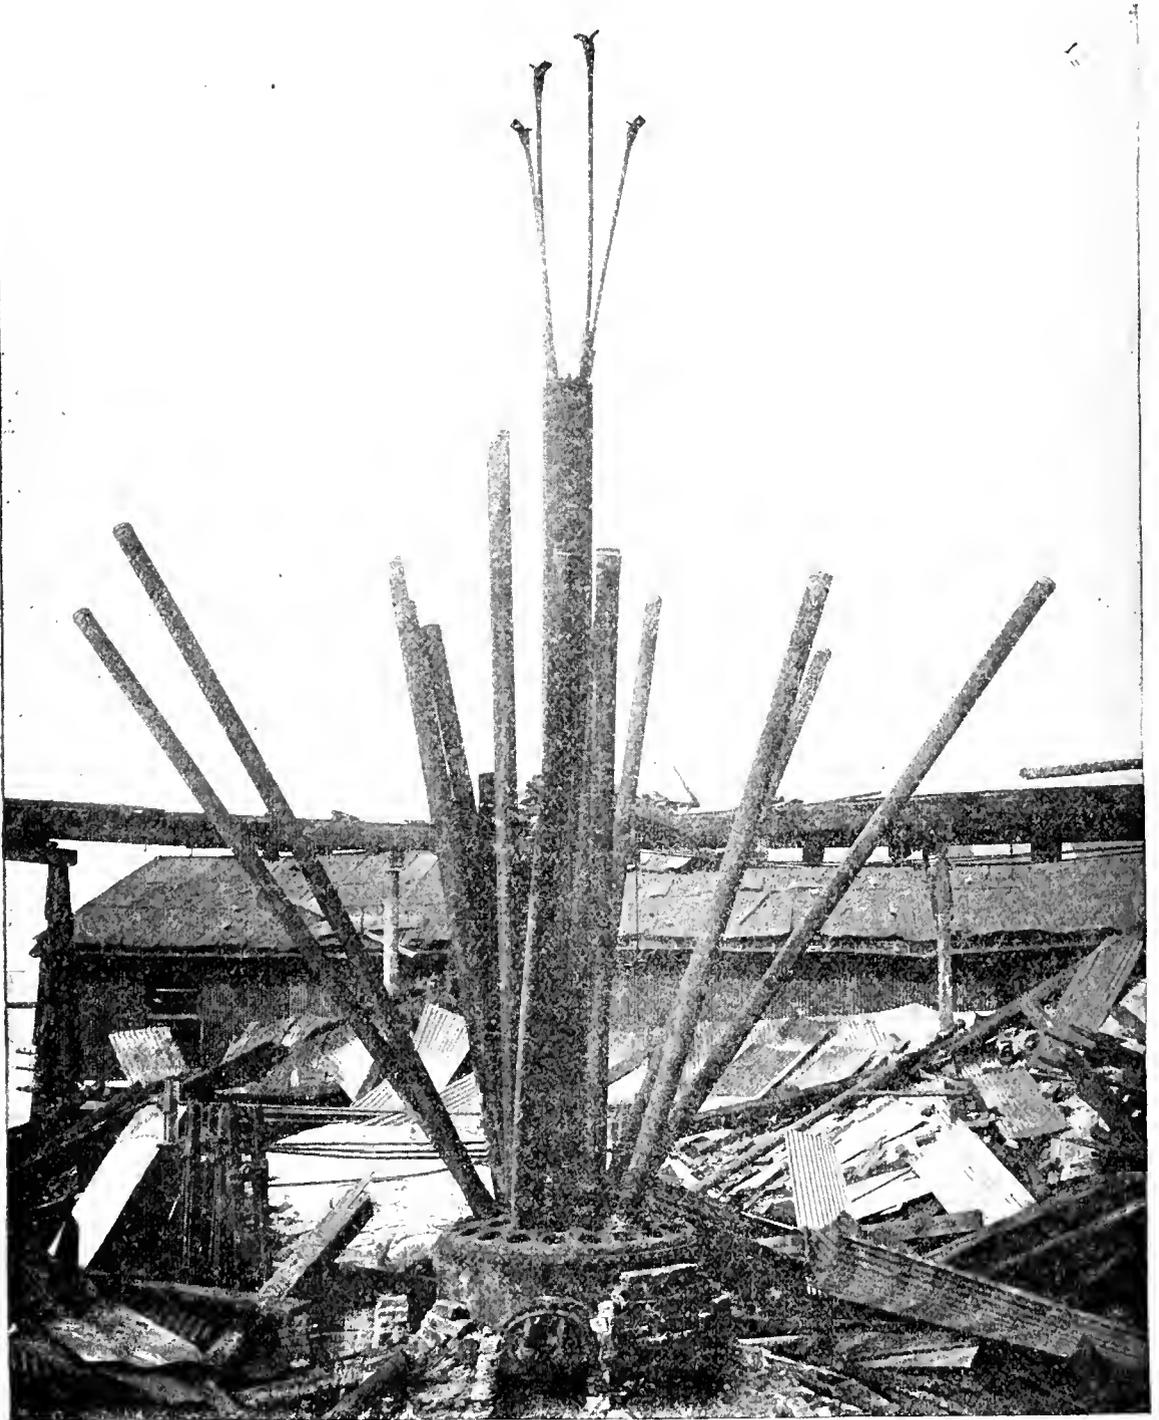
SHOWING THE EXPLODED BOILER IN DETAIL.
